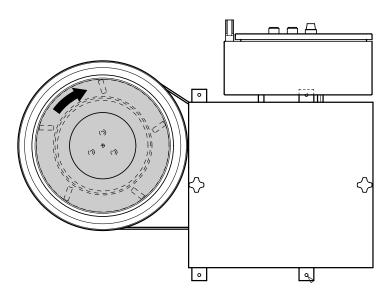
Top view; connect wiring so that impeller turns clockwise.
